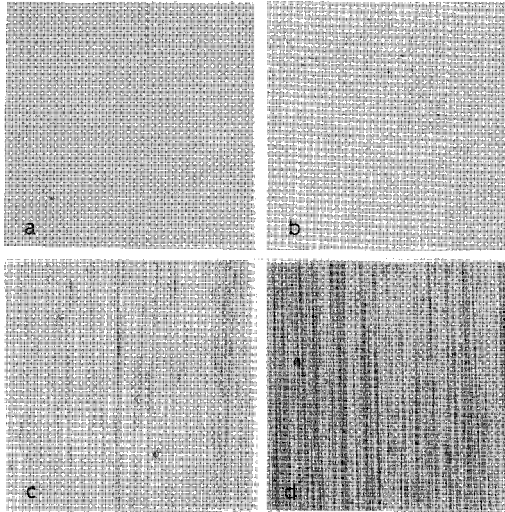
Optical Micrographs of Different Surface Finish of Test Specimens.
